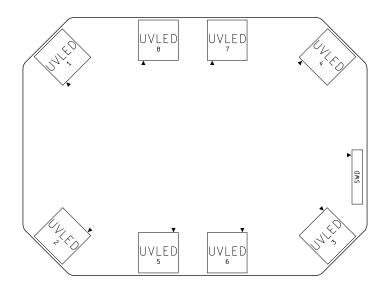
MRS MODULE - UVDAR: Connectors Placement, Top Layer
